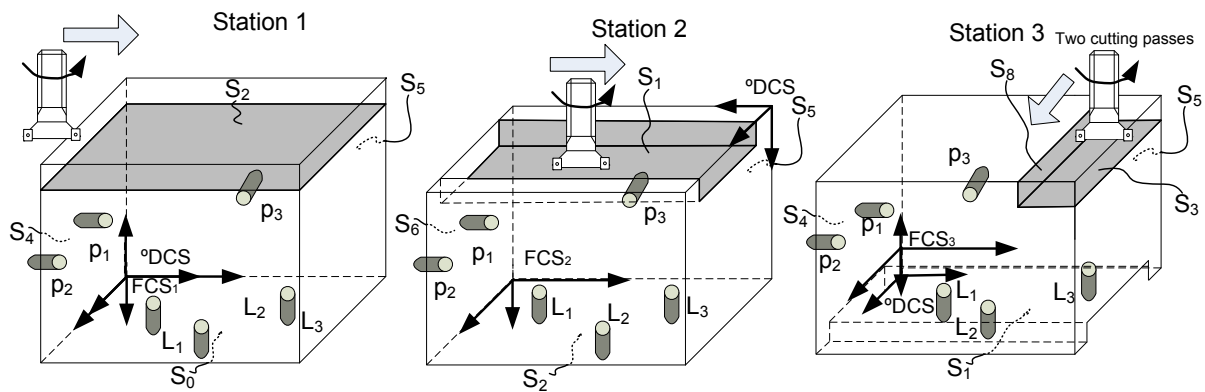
Case study. Part to be machined in a 3-station machining process.
